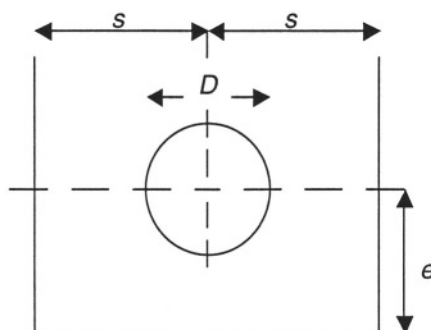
Dimensions of Mechanically Fastened Joint of Thickness, t .
